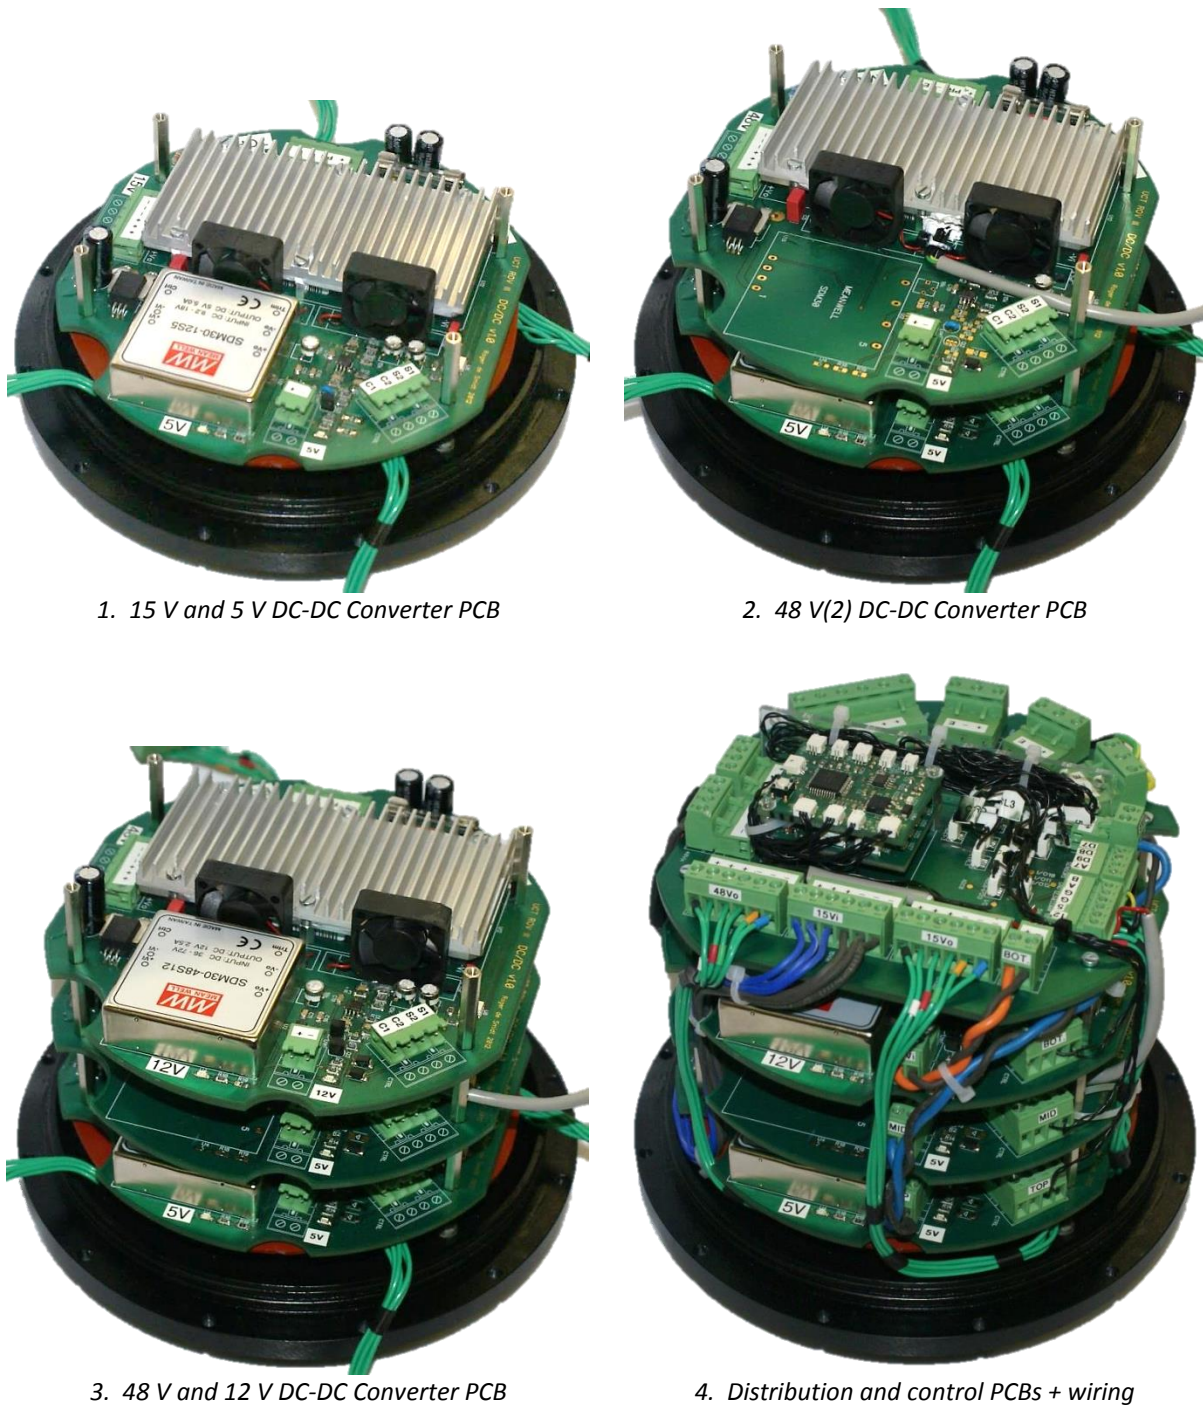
Progressive assembly of electronics stack on the Power Pod lid
